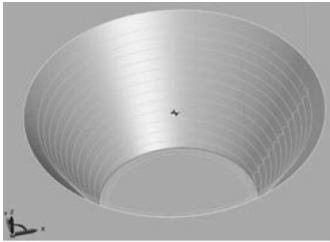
Tool path with 2.5 mm stepped pitch, [14]
